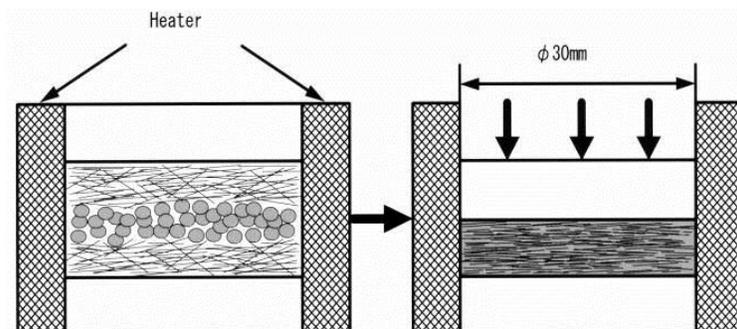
Hot press forming with the cylindrical mold: (left) before molding, (right) after molding
